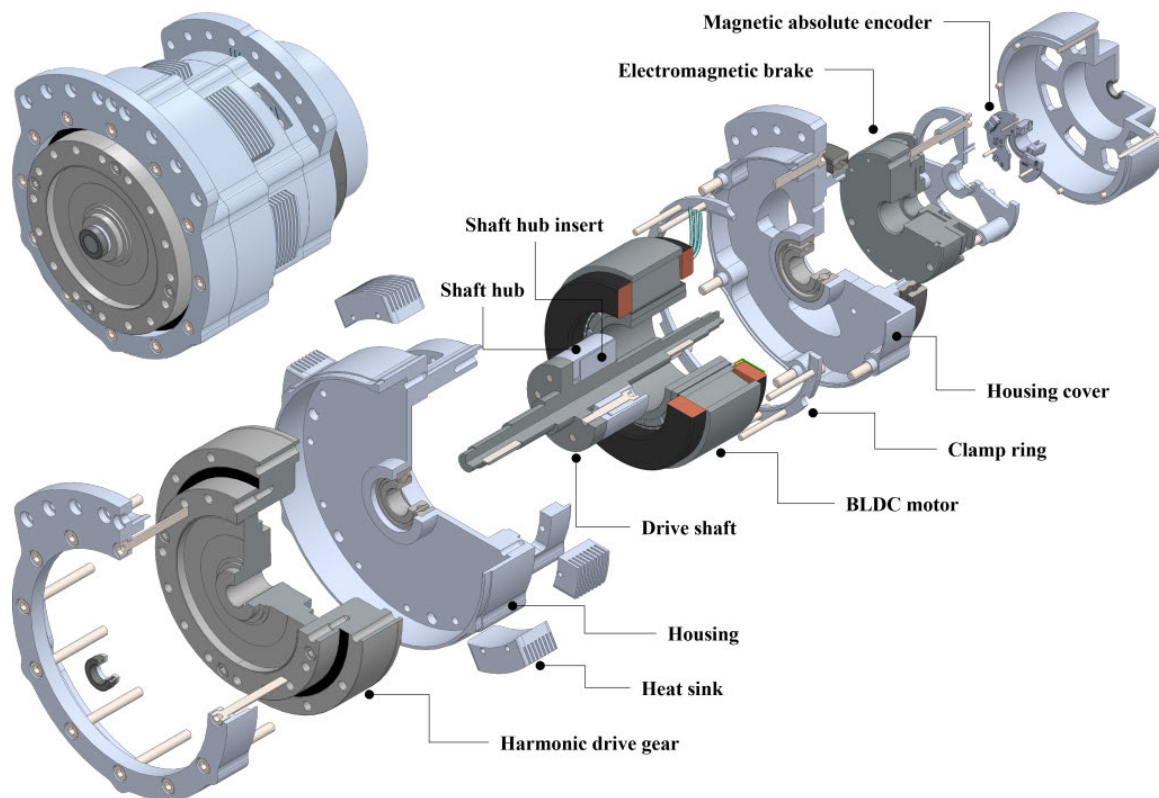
An assembled actuator is placed at top left and it breaks down as follows: a harmonic drive gear, housing, drive shaft, shaft hub, shaft hub insert, BLDC motor, clamp ring, electromagnetic brake, magnetic absolute encoder, six heat sinks, etc. All parts except for a drive shaft are made of aluminium alloy and the drive shaft is made of stainless steel.
